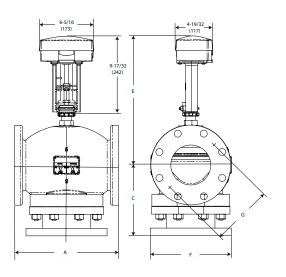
M1500A Series U-Bolt-style Flanged 3-Way Globe Valves
